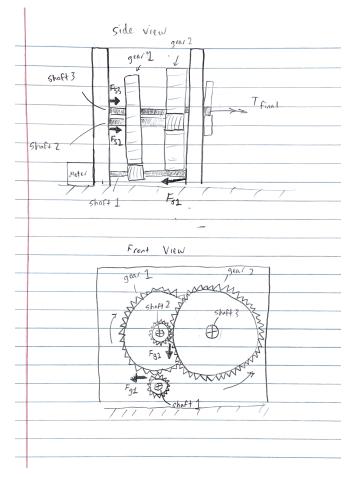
Free Body Diagram of Forces in Gear-Shaft System
